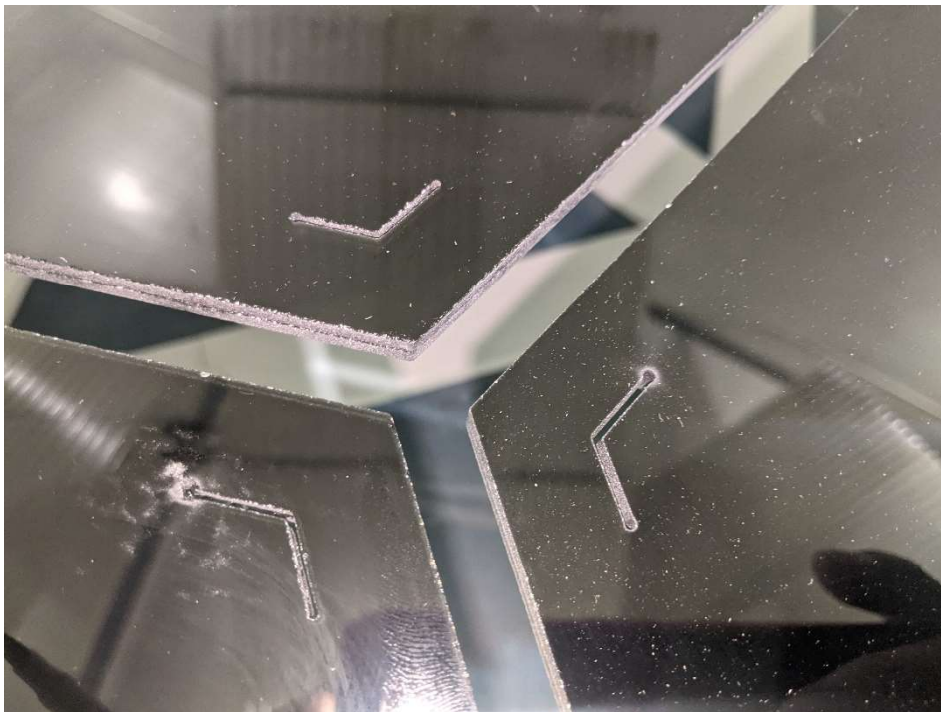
Detail of air gaps between adjacent pairs of glass plates
